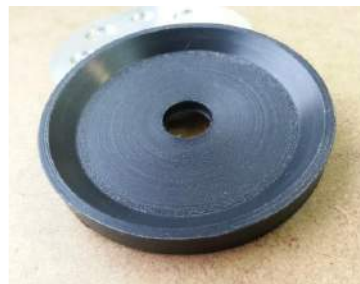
The new rotor manufactured on the 3D printer using Nylatron
